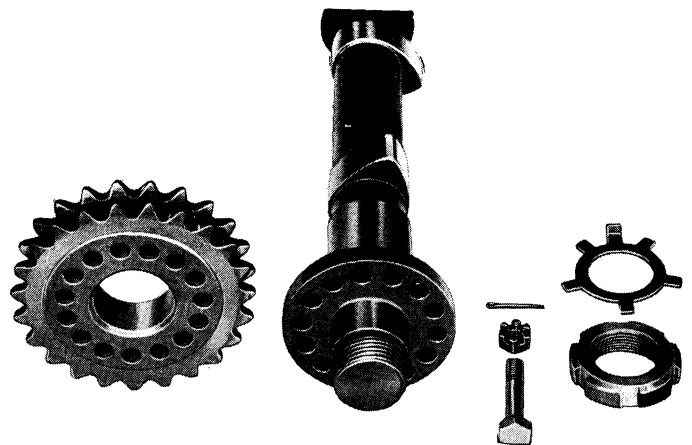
Flanged camshaft with sprocket, location screw, nut, cotter pin, adjuster ring and lockplate (engine 118 B.000).
